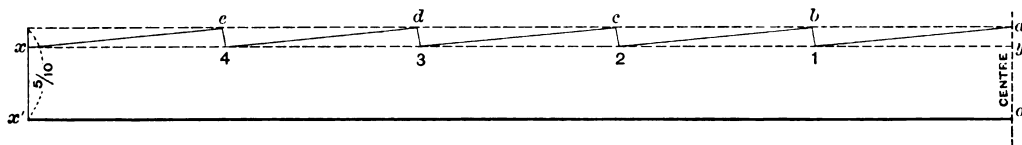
Showing Manner of Obtaining the Cutting Lines.
